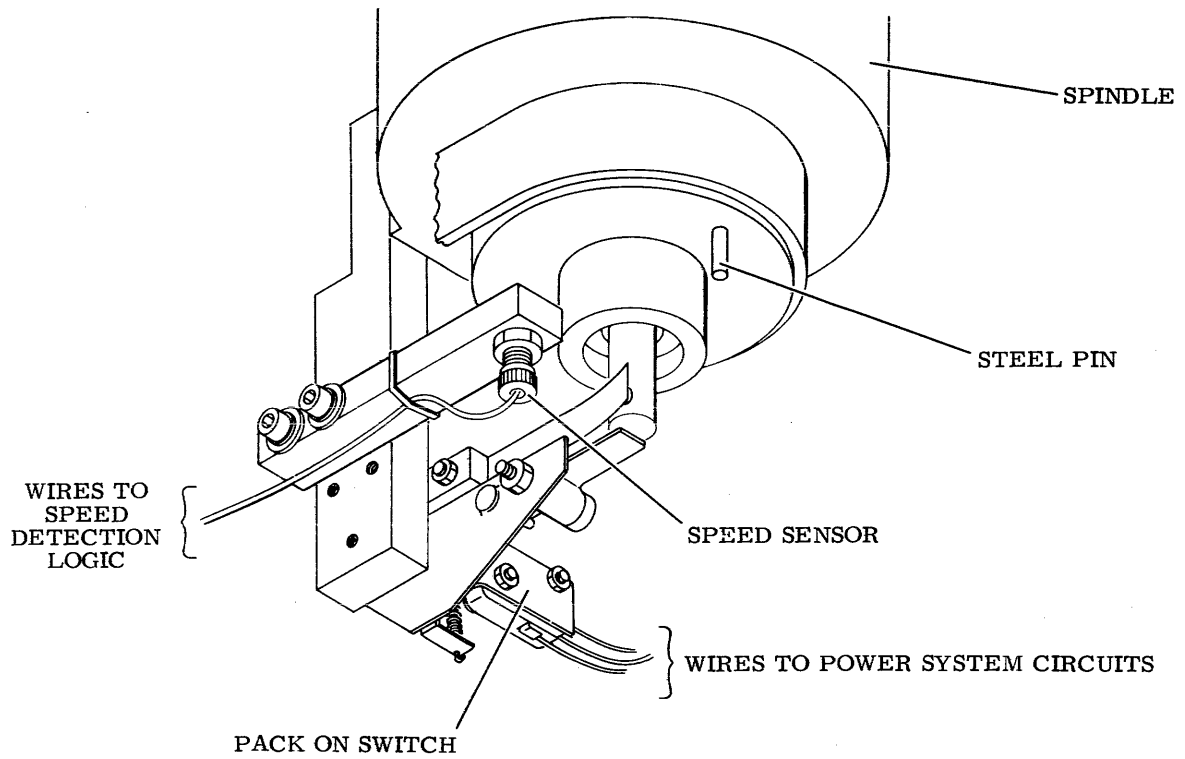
Speed Sensor and Park On Switch Assemblies
